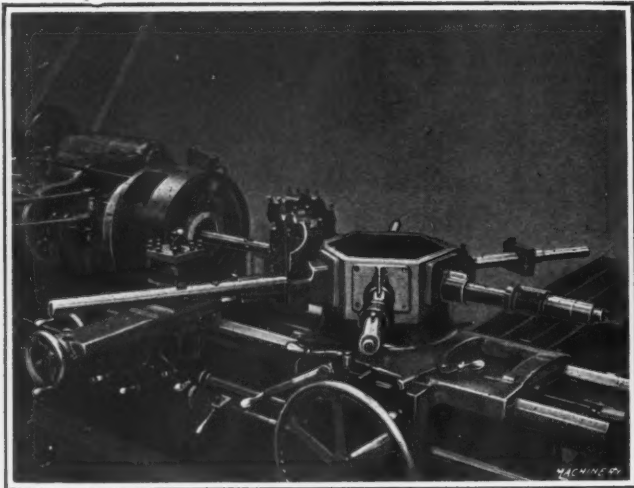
Machine Set-up for performing the First Operation on the Valve Body
